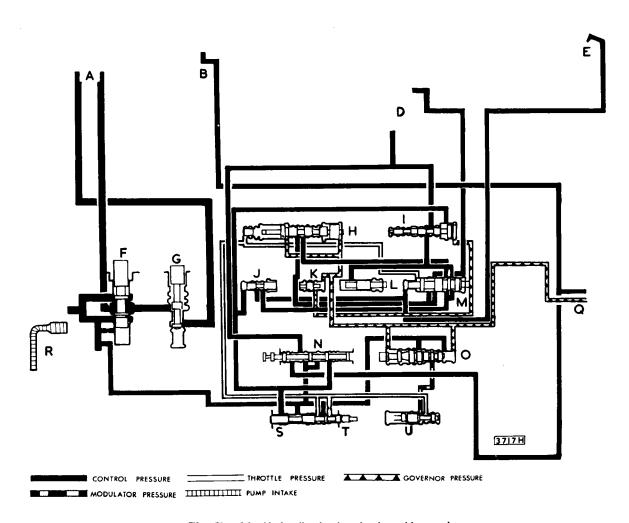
Hydraulic circuit — Lock-up (1st gear)
